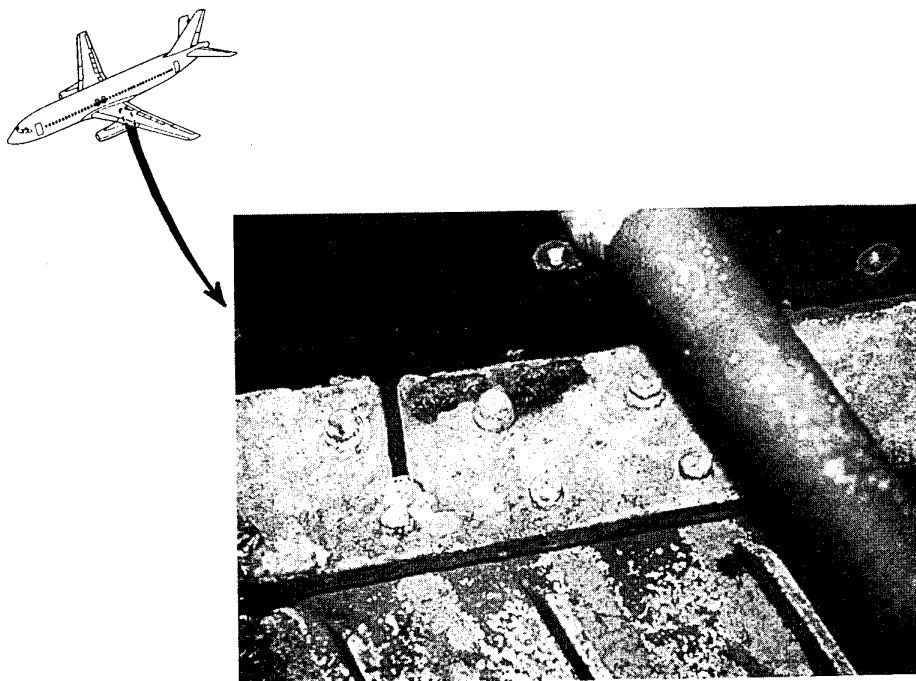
MERCURE Aircraft : Internal Corrosion on Wing Lower Panel
